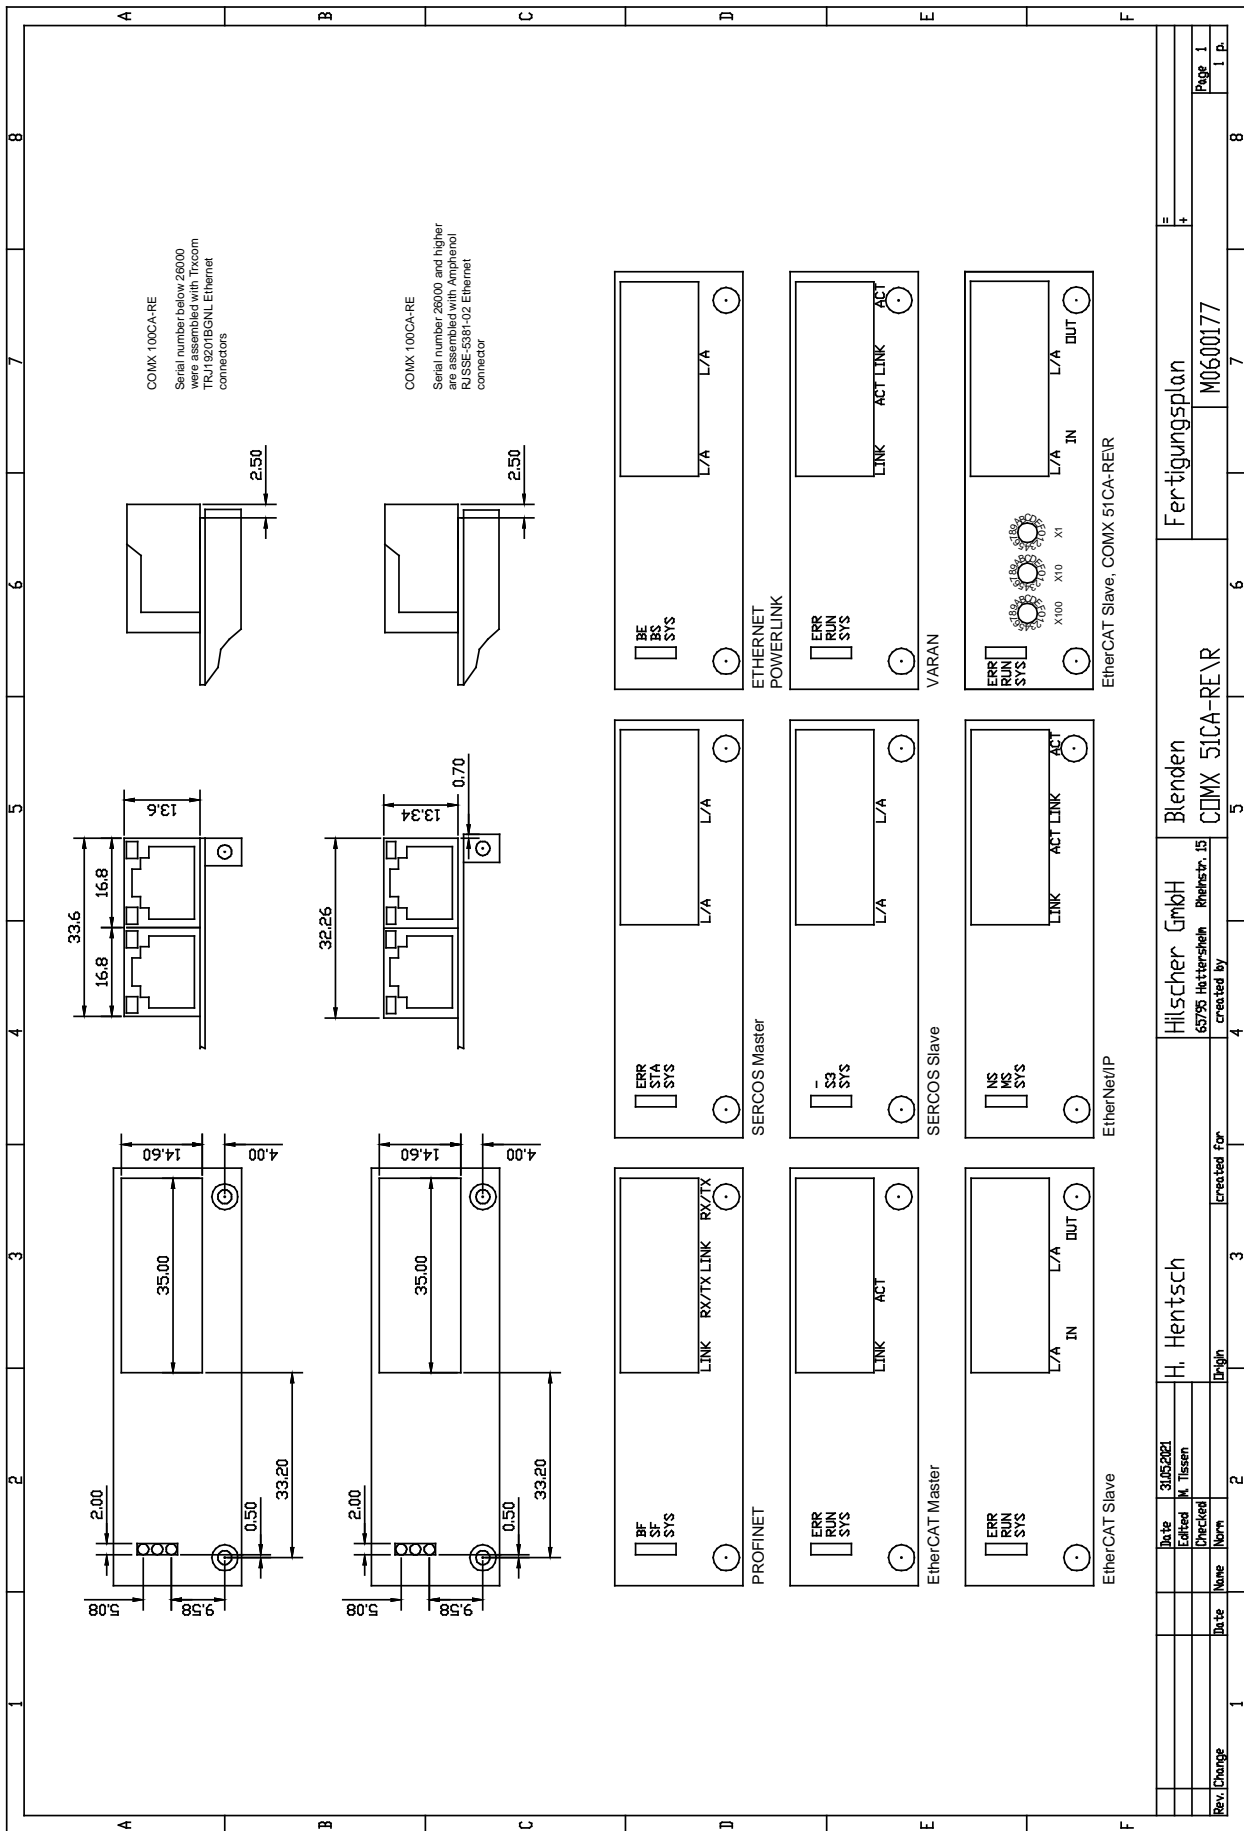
Mechanical dimension of cover and connector of COMX 51/100CA-RE and COMX 51CA-REVR
